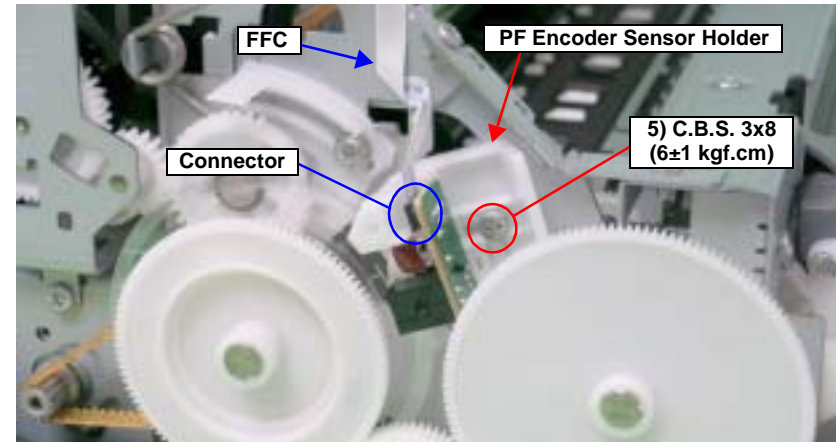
Removing the FFC and the Screw that Secures the PF Encoder Sensor Holder
